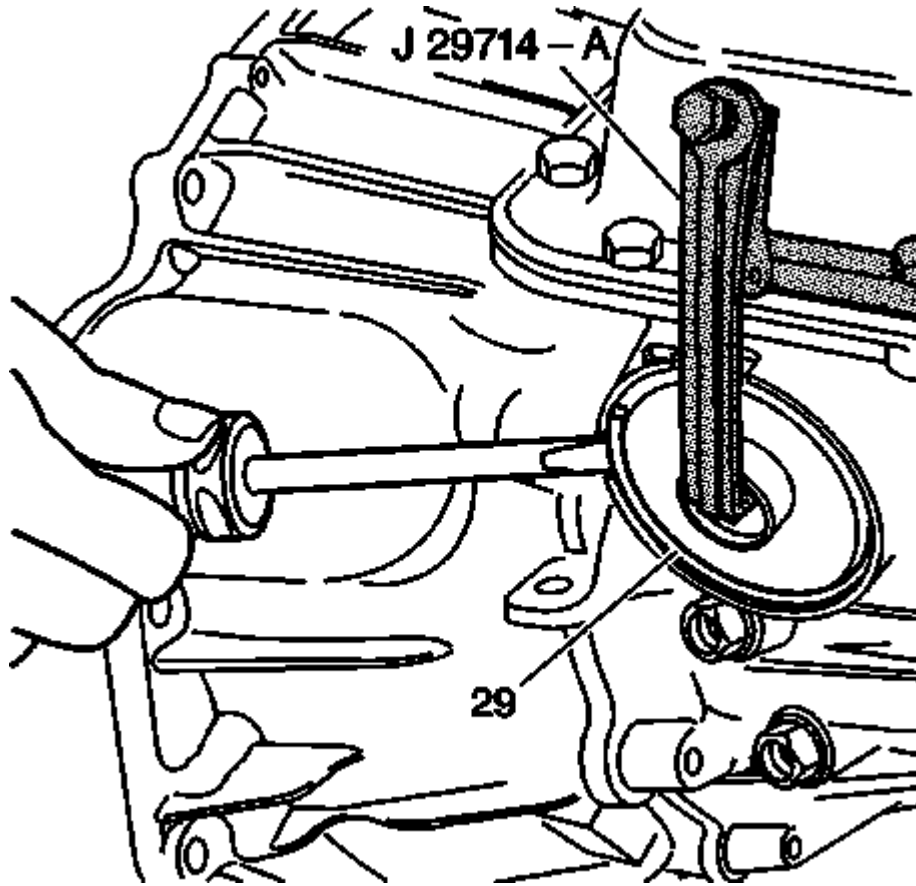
View Of Overrun Clutch Backing Plate Retainer Ring
